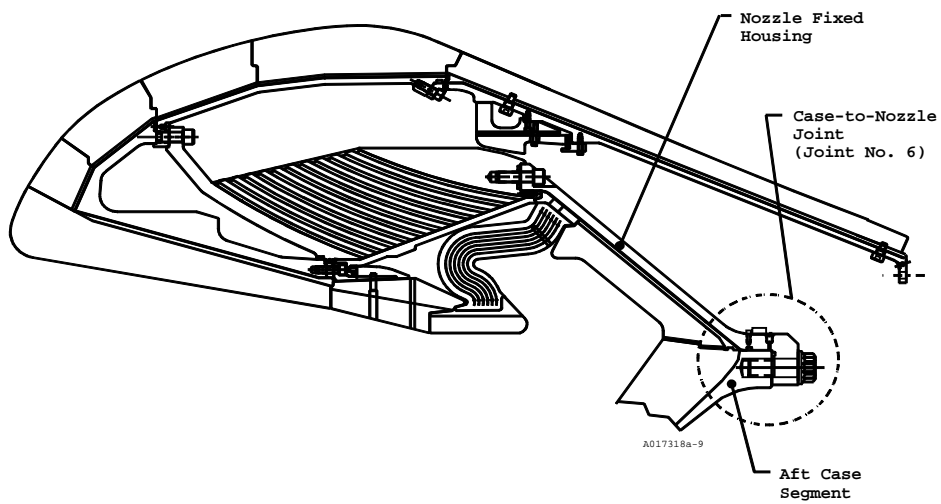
Case-to-Nozzle Joint, Metal Components Location
